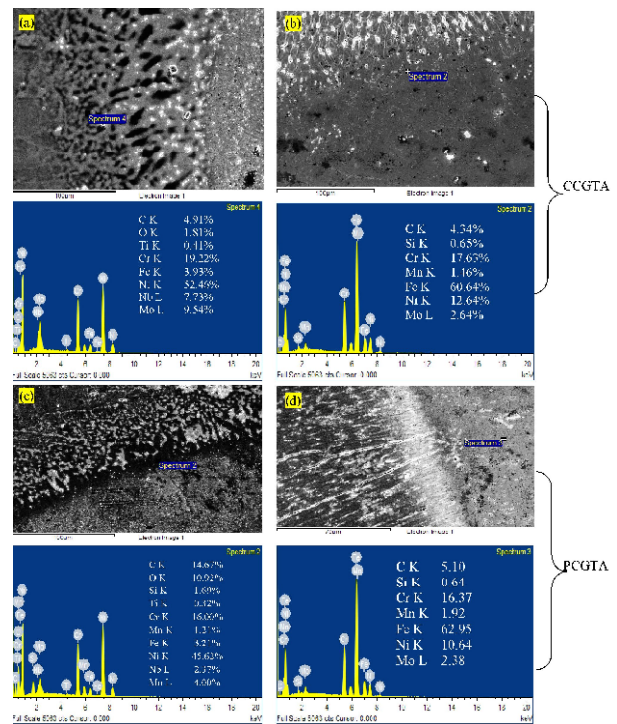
SEM/EDAX point analysis on the dissimilar weldments of Inconel 625 and AISI 316L employing ER2209: (a), (b) CCGTA weldments; (c), (d) PCGTA weldments.
